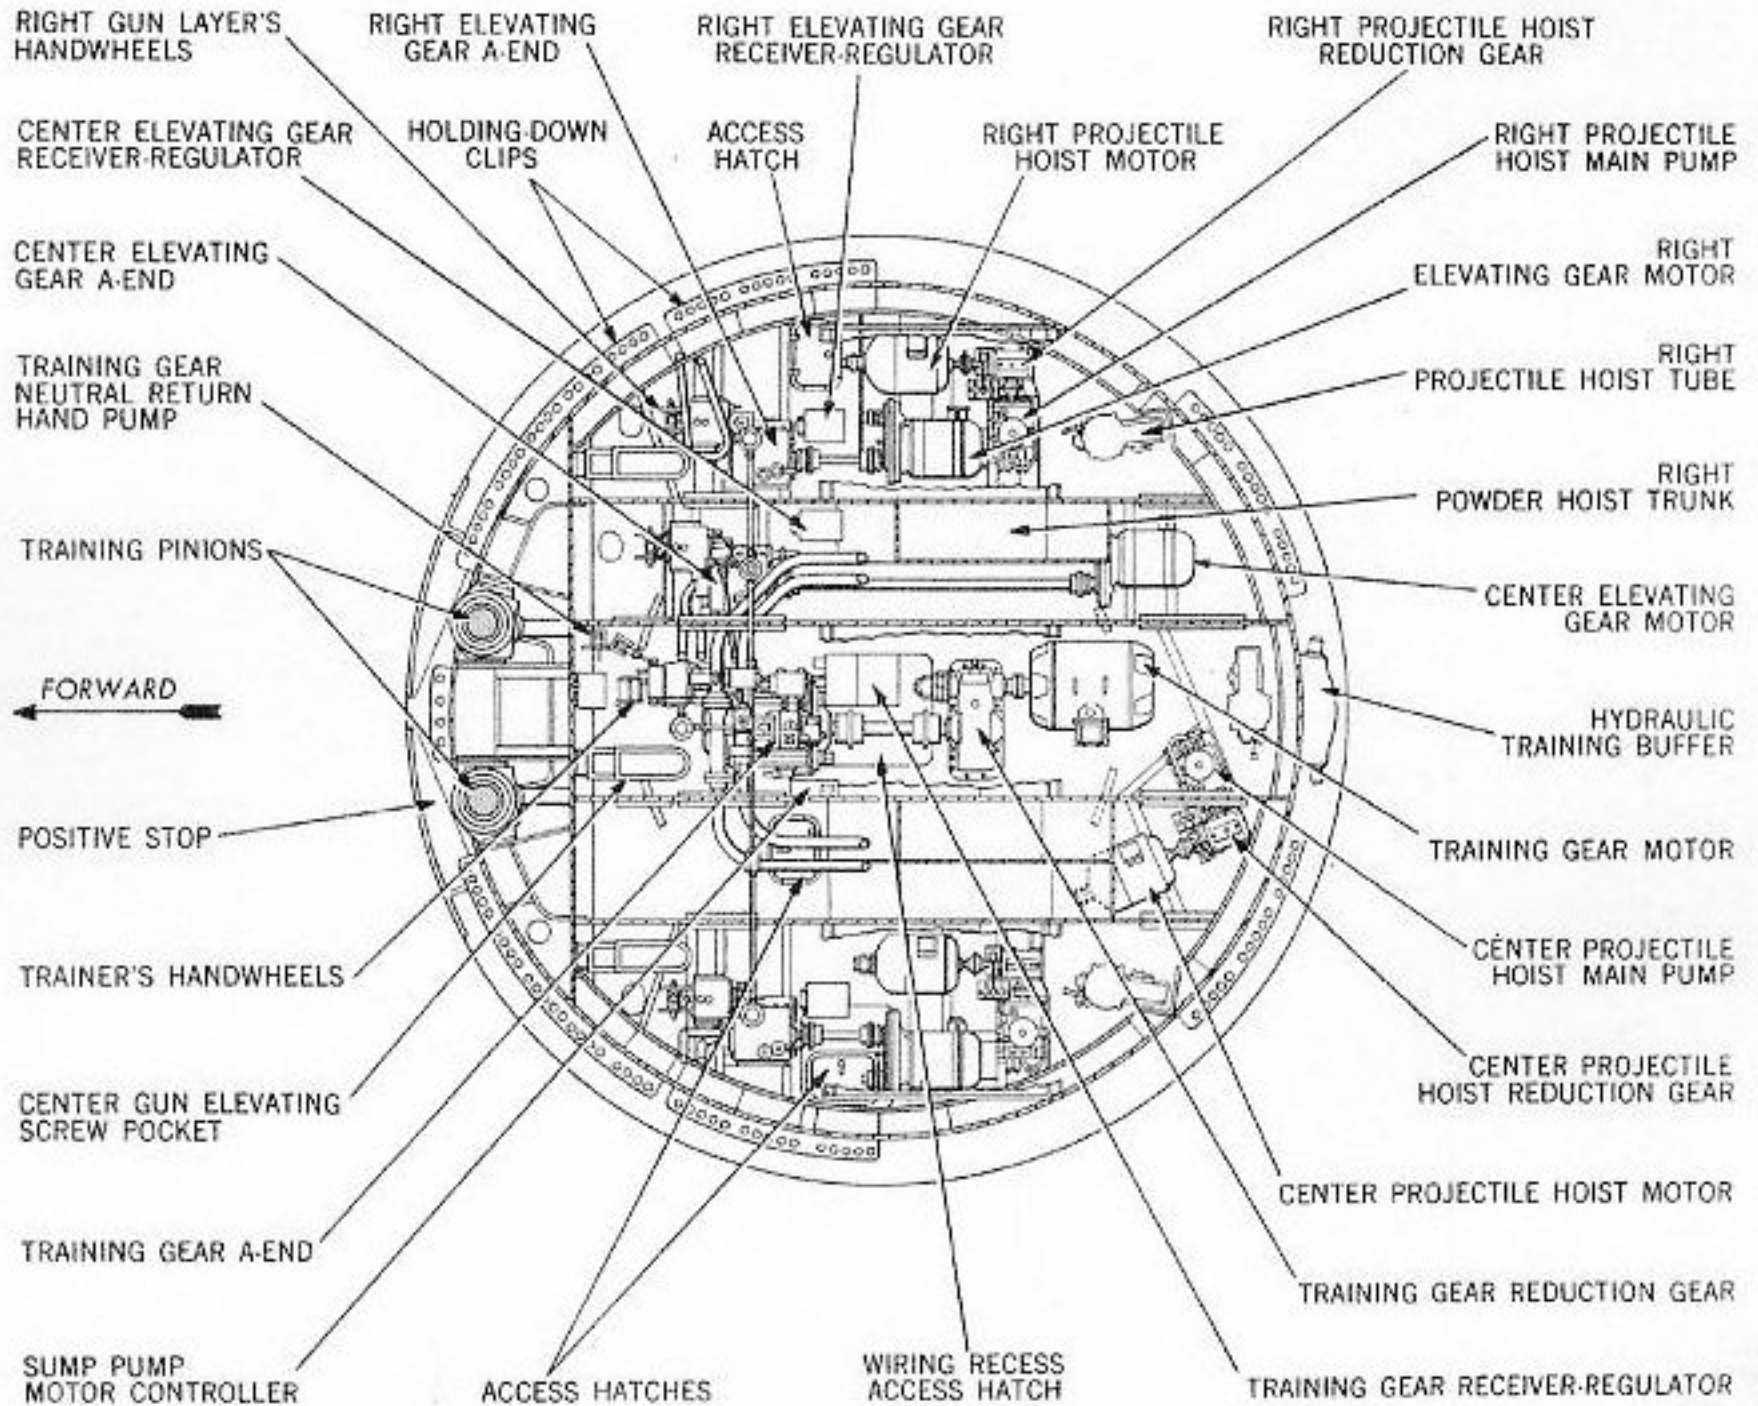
Ordnance Equipment on Electric Desk - General Arrangement - Plan View
